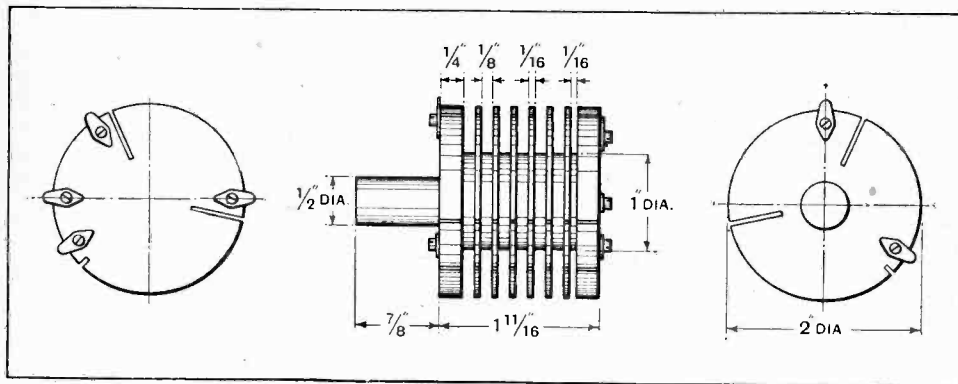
Dimensional drawings of special long-wave transformer bobbin.
